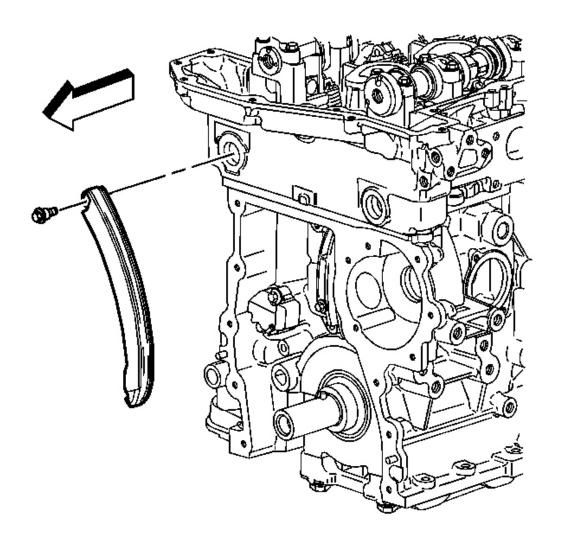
View Of Timing Chain Tensioner Shoe & Bolt Courtesy of GENERAL MOTORS CORP.
